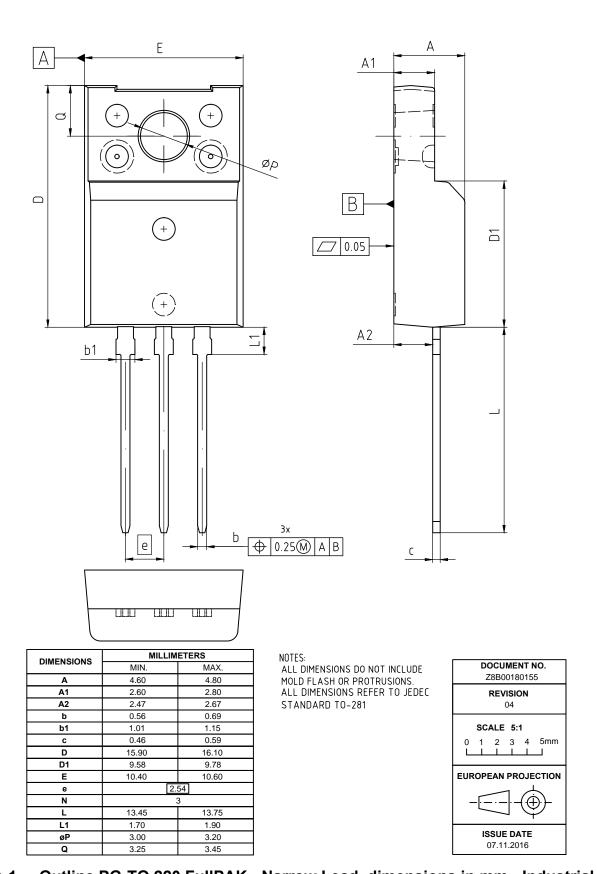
Outline PG-TO 220 FullPAK - Narrow Lead, dimensions in mm - Industrial Grade
